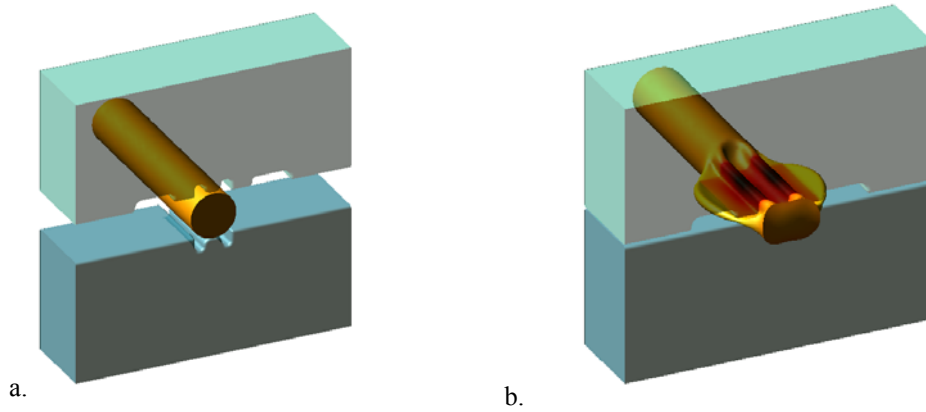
Forged part in the experiment in the beginning (a) and end of forging (b)
